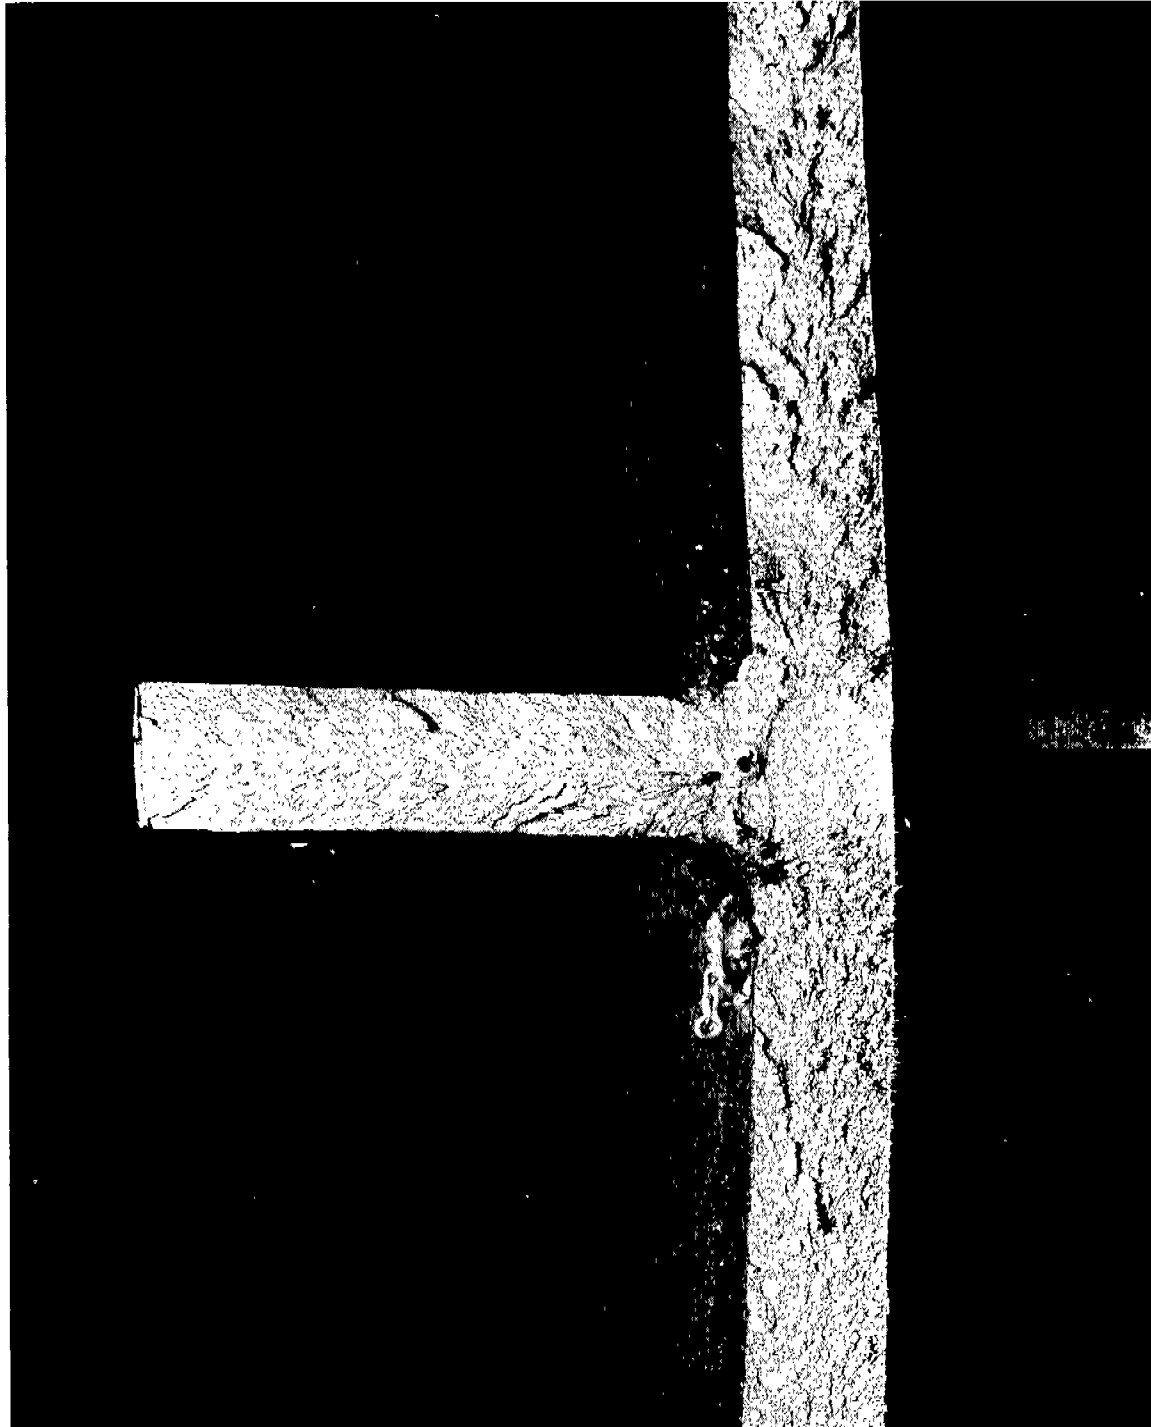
Overall View Of The Fracture - Test B15; Specimen Configuration: 5-1/2" Edge Slot Plus 1/2" Fatigue Crack In A 120 x 12" Panel - Stiffened Plate; Test Temperature: +10°F; Fracture Stress: 20,500 Psi On The Gross Section; 21,500 Psi Avg. On The Net.
